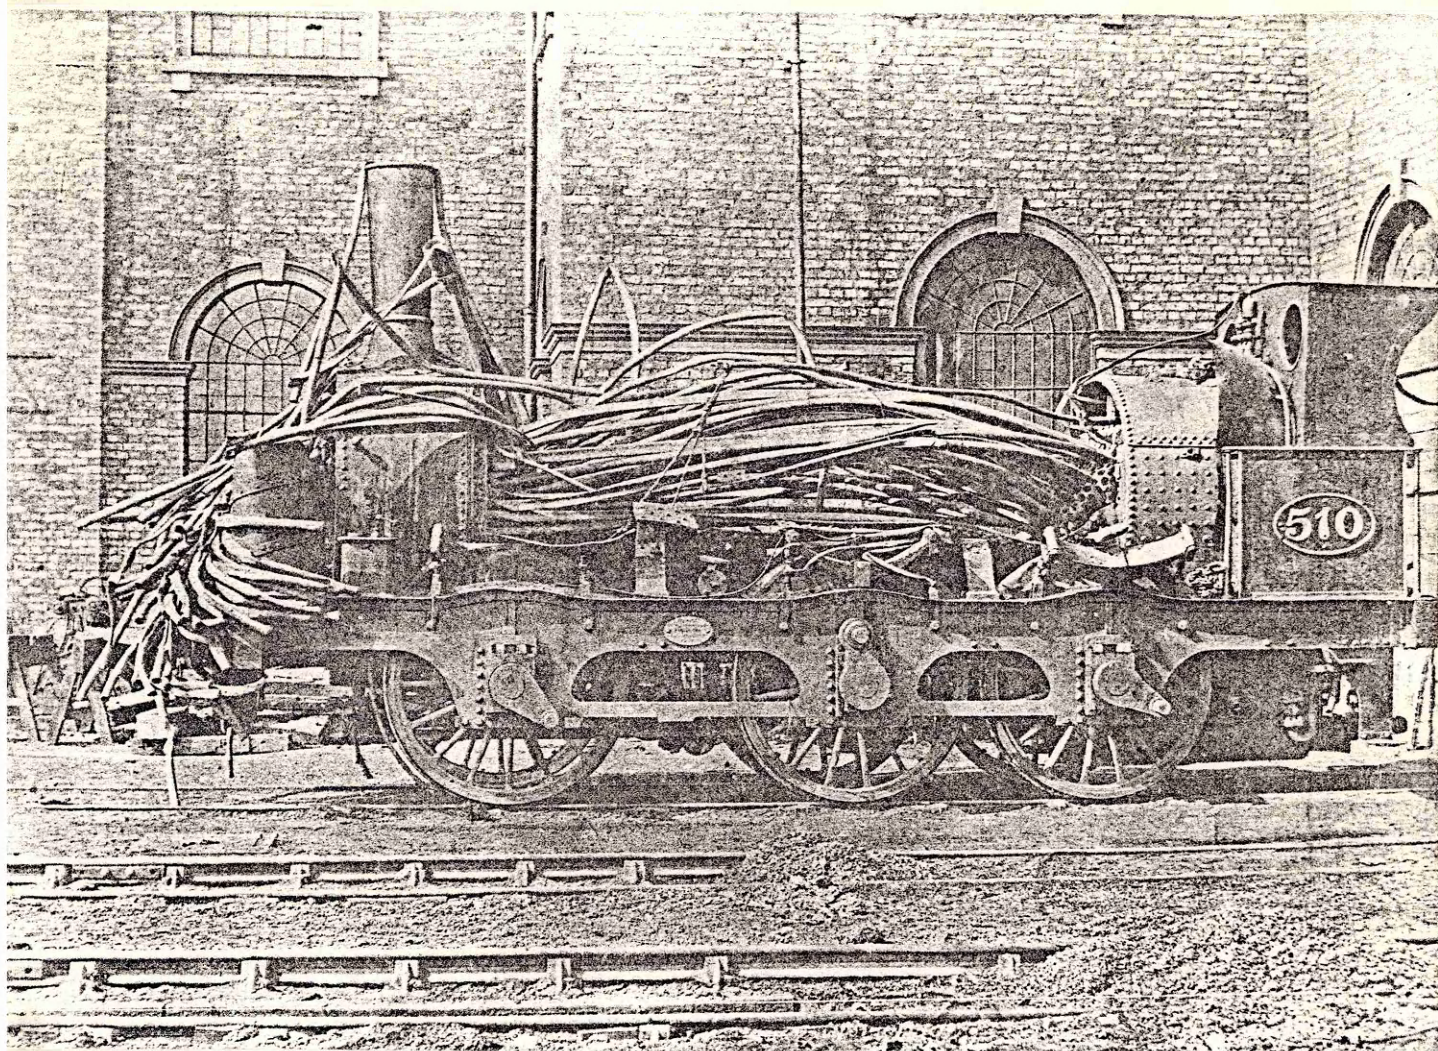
LOCOMOTIVE BOILER EXPLOSION:- FROM M.S.U.A. ARCHIVAL MATERIAL.
